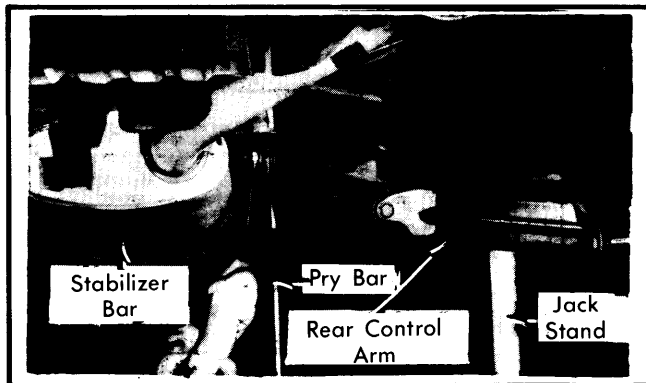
Adjusting Rear Wheel Alignment Eldorado, Riviera, Seville & Toronado
